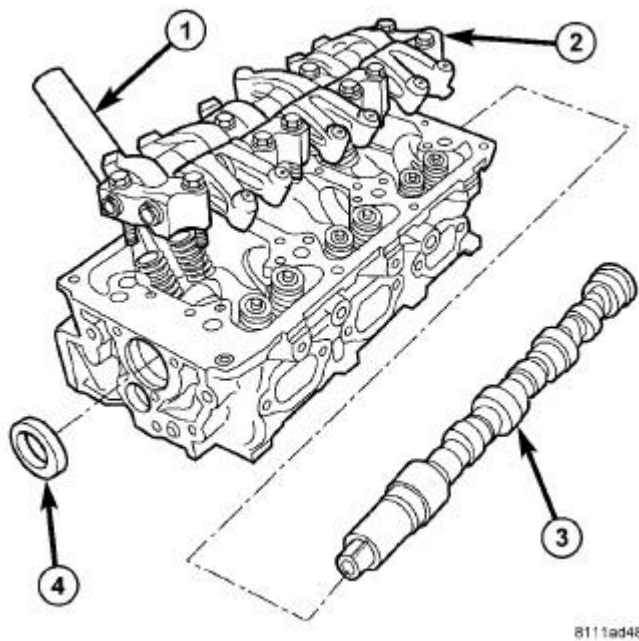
Camshaft, Rocker Arm Assembly & Cylinder Head
